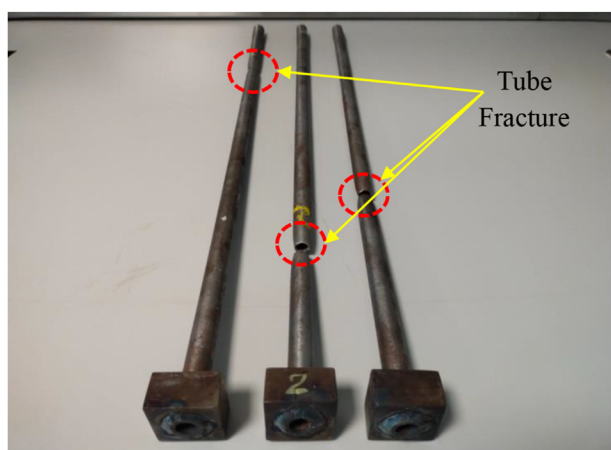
Fractured welded tube and tubesheet joints after tube pull-out test.
